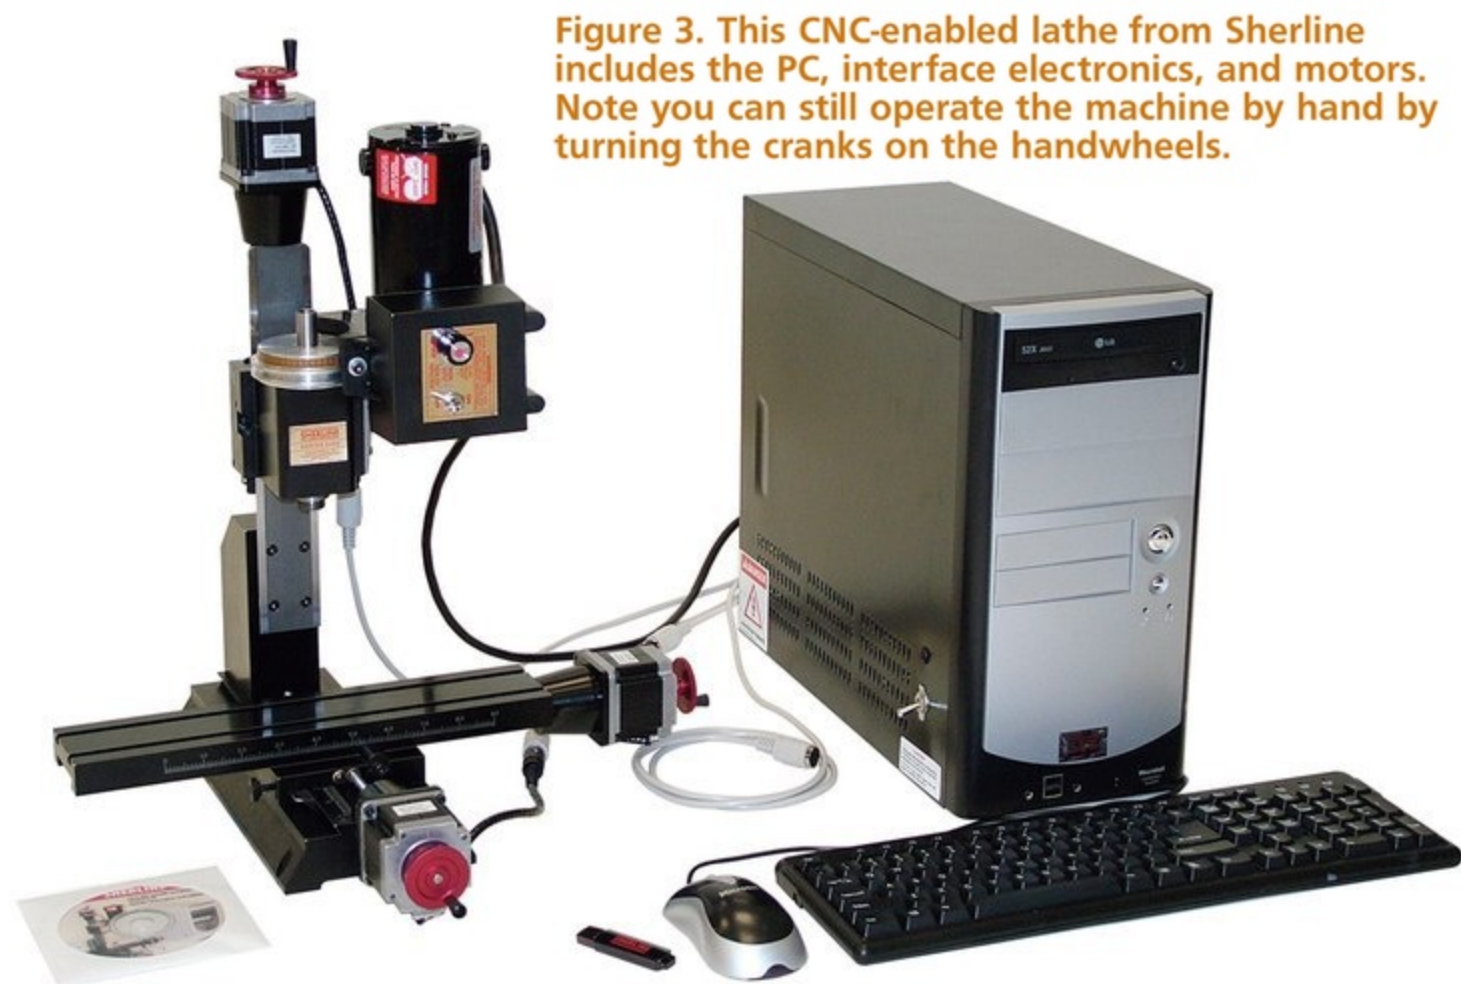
This CNC-enabled lathe from Sherline includes the PC, interface electronics, and motors. Note you can still operate the machine by hand by turning the cranks on the handwheels.
